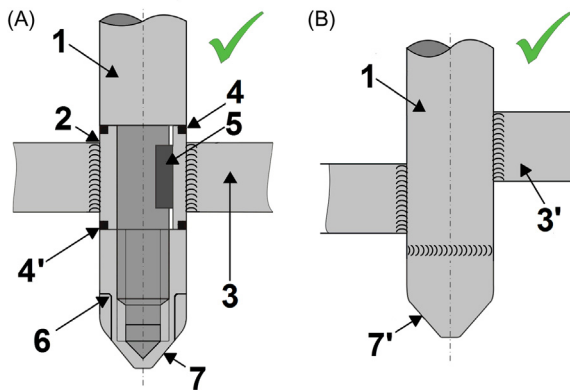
The hub (2) with blades (3) is secured to the shaft (1). All voids should be closed by either fabrication (welding) or approved sealing techniques (O-rings, seals, etc.) to give surfaces ground flush and free of crevices at points of metal-to-metal contact. (A) Food quality gaskets under controlled compression respectively may seal the propeller hub to the shaft (4) and end cap (4'). Keyways (5), where employed due to mechanical design considerations, shall have edge radii not less than 3 mm. The corners of the spanner flats (6) on the end cap have been radiused. (B) An all-welded impeller assembly (e.g., hub, blades, end cap) is still preferred. Impeller hubs welded to the shaft are preferred over removable hubs. Although the designer may omit the hub, and immediately can attach the blades to the shaft by welding (3'). Finally, also the end cap (7') can be welded to the shaft ([Hauser et al., 2004b](#); [Moerman and Kastelein, 2014](#)).
